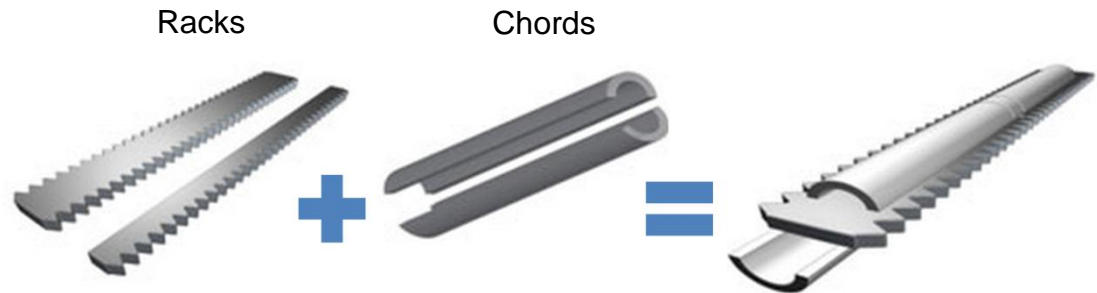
Elements of jack-up rig welding assembly [30]
